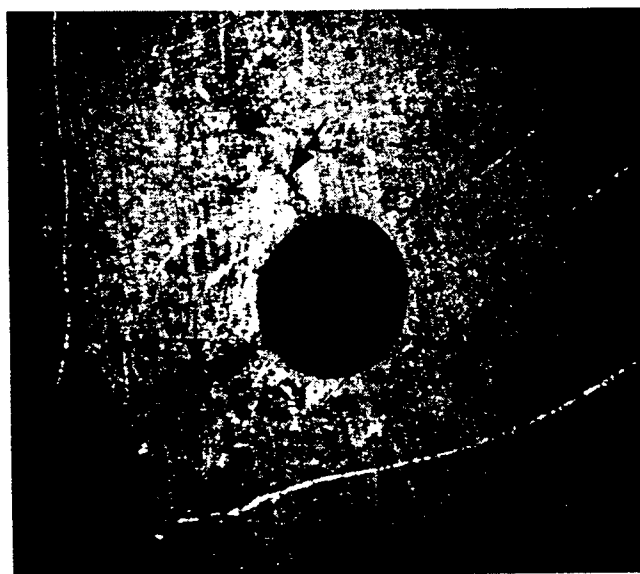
Faying surface cracks not aligned with the normal to the hoop stress (cracks indicated by arrows). The crack in Figure 3 appears at the lower right side of the rivet hole.³
